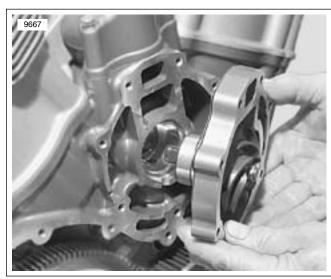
Water Pump Bearing Housing Assembly (clutch cover removed for clarity)
